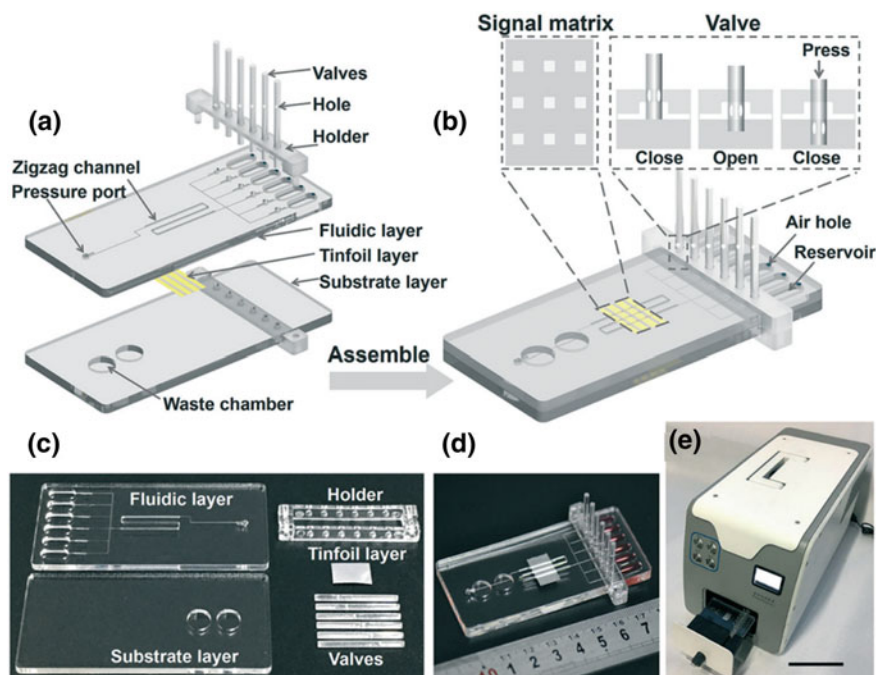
Design layout, fabrication process and assembly of an integrated microfluidic chip equipped with on-chip valves for chemiluminescence immunoassay (Hu et al. 2017)
